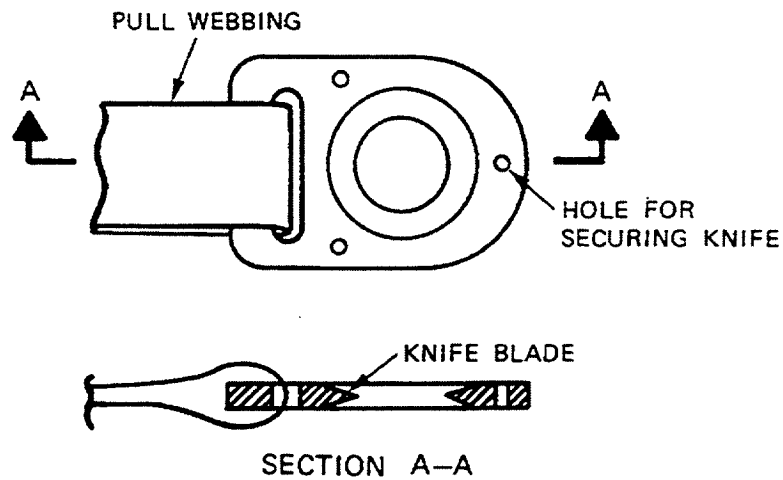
Cut knife diagram showing top and side views. Three holes in cut knife are for tacking cut knife in place on deployment bags.
